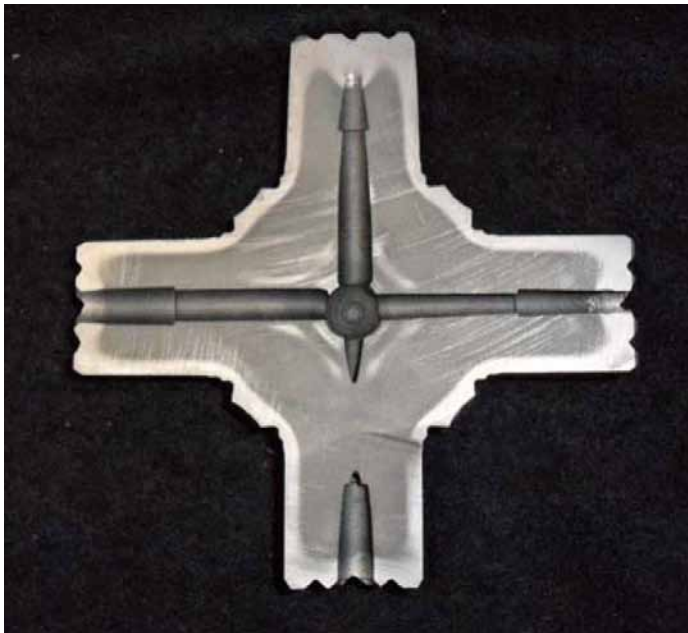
Induction-hardened automotive journal cross section (courtesy ERS Engineering Corp.).
